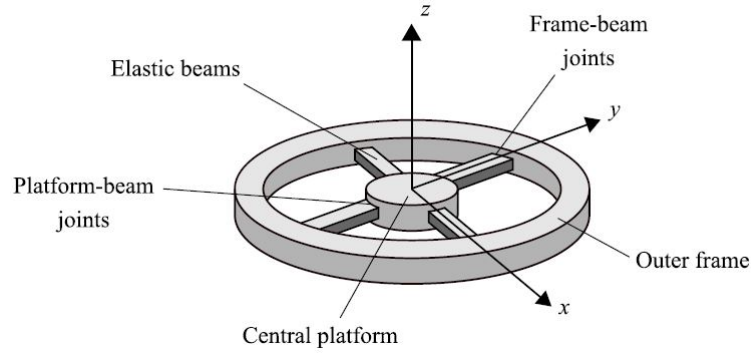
A typical design of a cross-beam structure force sensor which consists of the outer frame, central platform, and four elastic beams.
